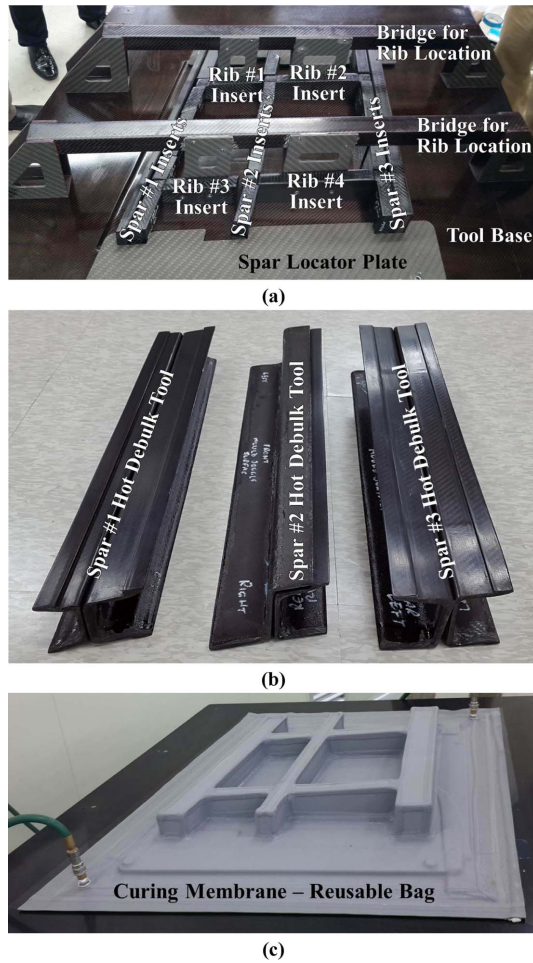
Configuration of tools; (a) curing tools, (b) hot-debulk tools, and (c) curing membrane
